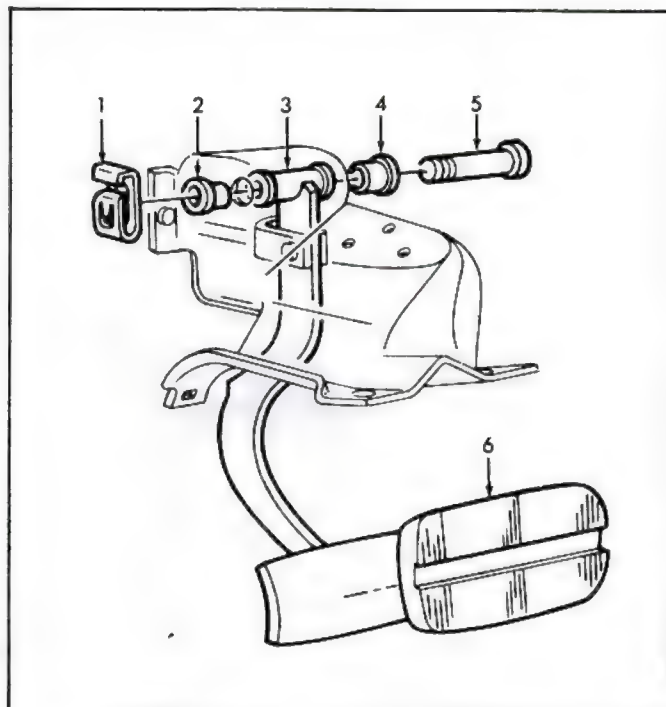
Brake Pedal and Attachments—w/Automatic Trans.
